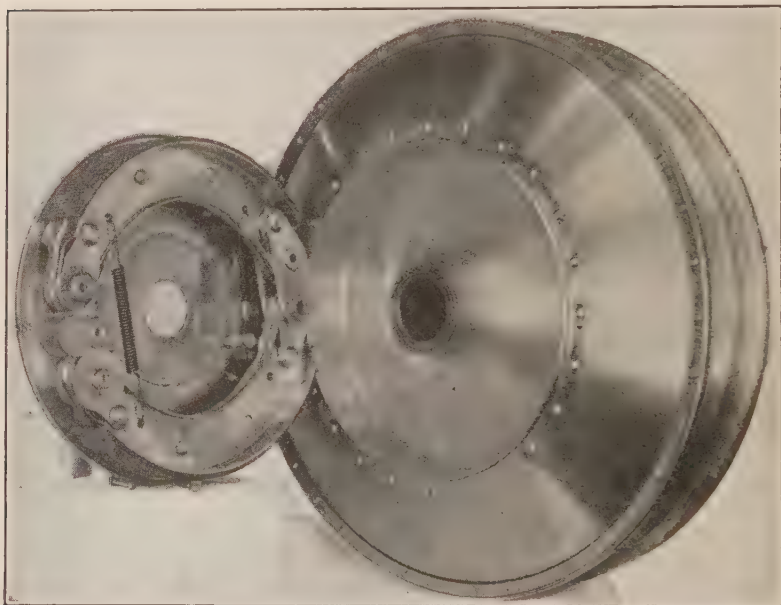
Airplane wheel and brake. Brake is removed from wheel to show construction. (Courtesy Bendix Brake Co.)
